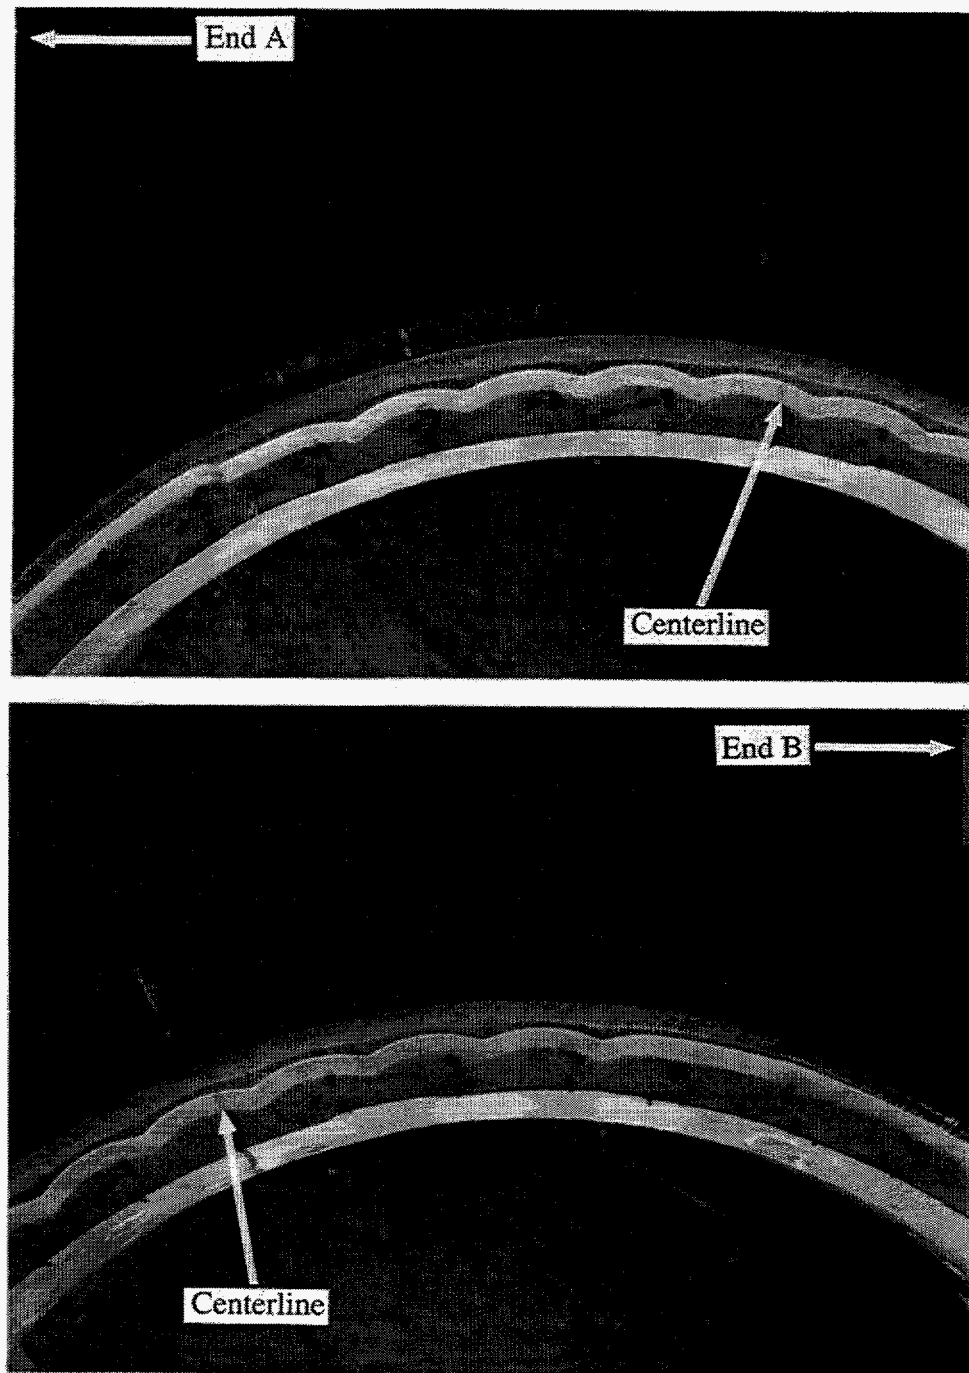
Views of the fracture surface at the flaw centerline for Experiment 1-4
